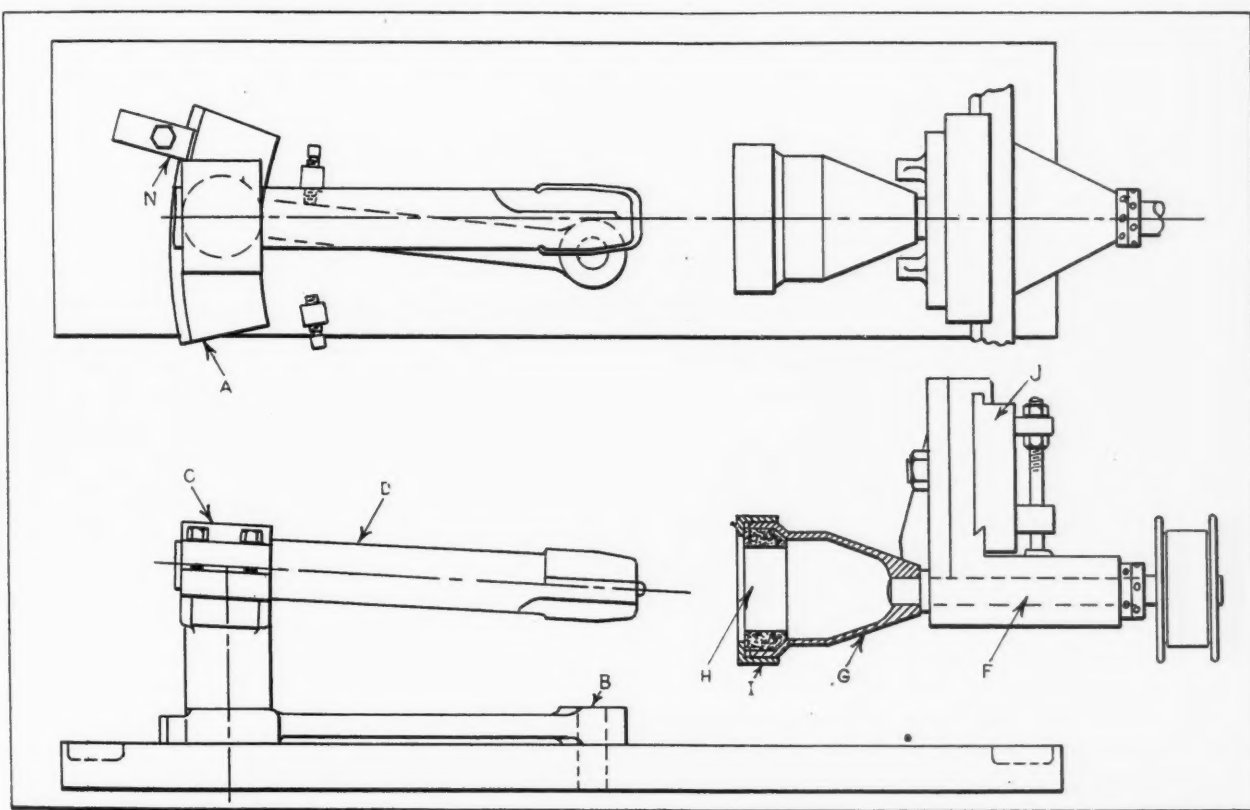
Fixture for Grinding Straight and Tapered Portions of Boring Cutter
